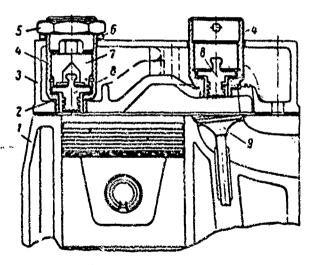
Diagram of scaler installation in Type ZIL-120 engine. 1) cylinder block; 2) gasket; 3) cylinder head; 4) scaler receptacle; 5) nut; 5) gasket; 7) tensioning nut; 8) scaler; 9) exhaust valve.
